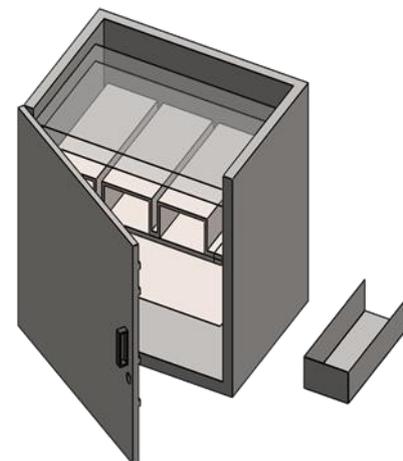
CAD Design of a Solar Baking Oven and its Baking Pan
